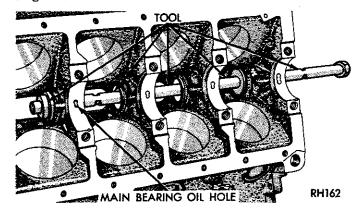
Removal and Installation of Camshaft Bearings with Tool C-3132A
